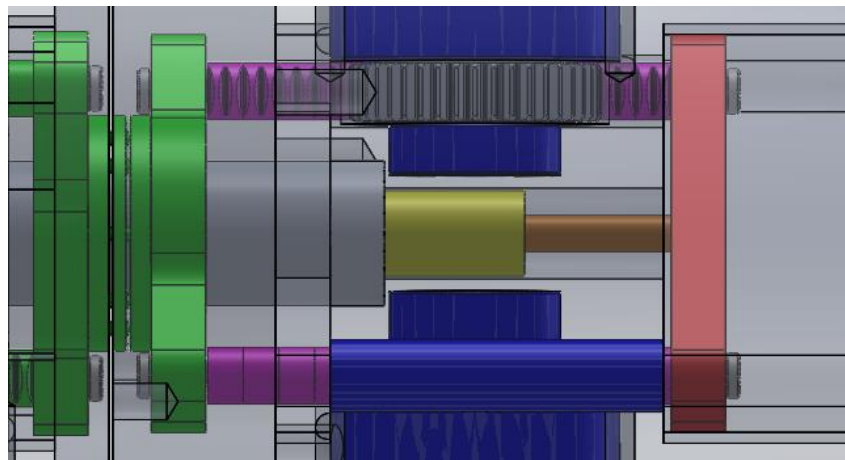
Force is transmitted from the connector and thrust bearing (green), to the second set of racks (purple), to the final connector (red), then to the actuator rod (orange).
